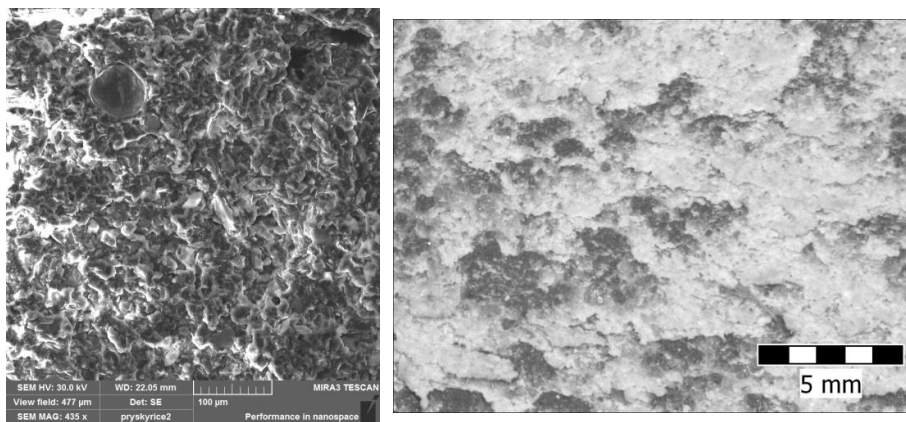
Fracture surface of cohesive type (adhesive A): macroscopic view on fracture surface (right), SEM fracture surface (left).
